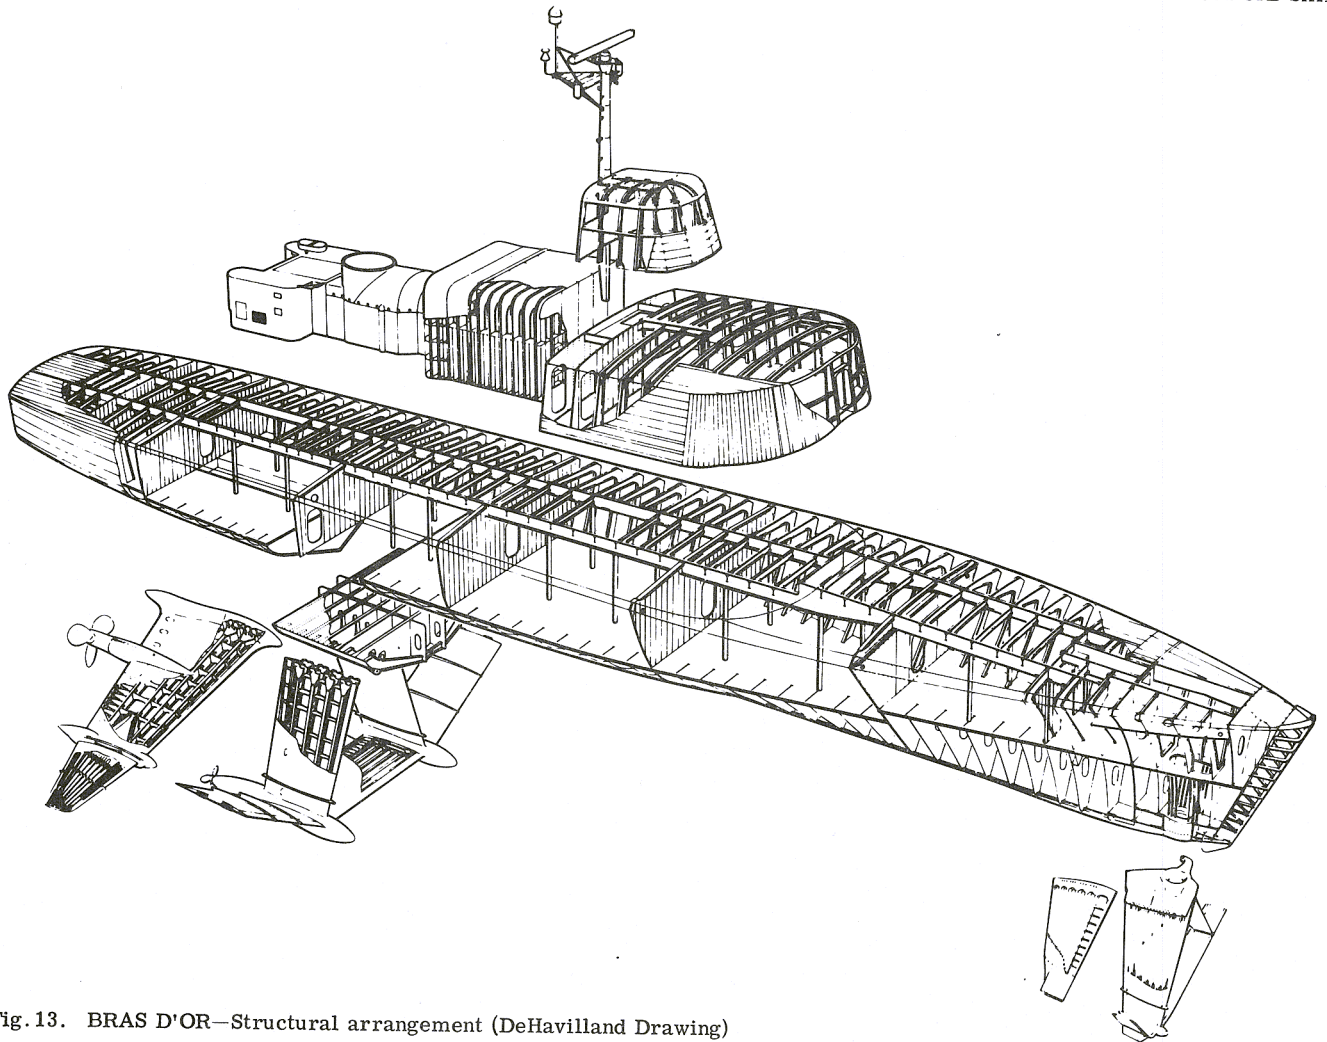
BRAS D'OR—Structural arrangement (DeHavilland Drawing)
